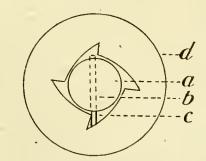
RATCHET ARRANGEMENT EMPLOYED ON SIDE-WHEEL MOWERS.
